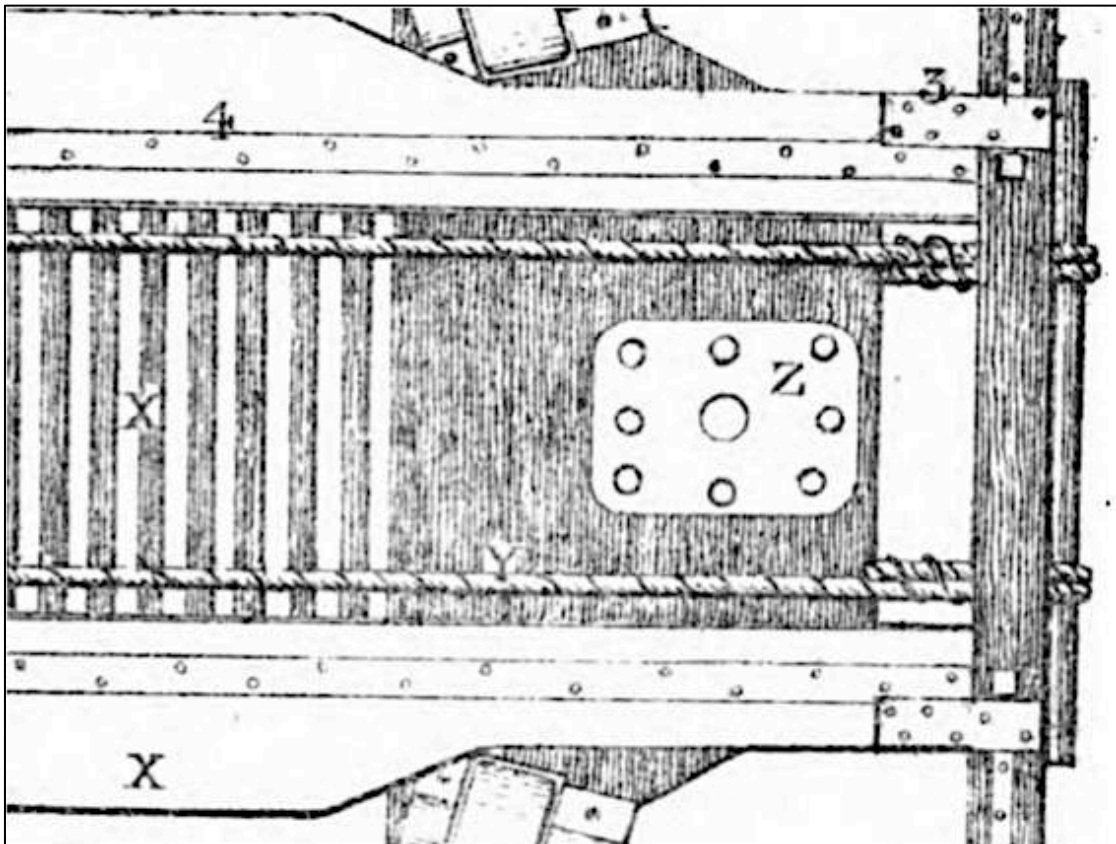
Pivot plate diagram (U.S. Navy Department 1860:Diagram K).
